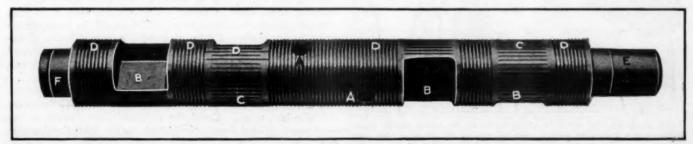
The improved rotary valve shaft or distributer in valveless motors adopted for Darracq cars
